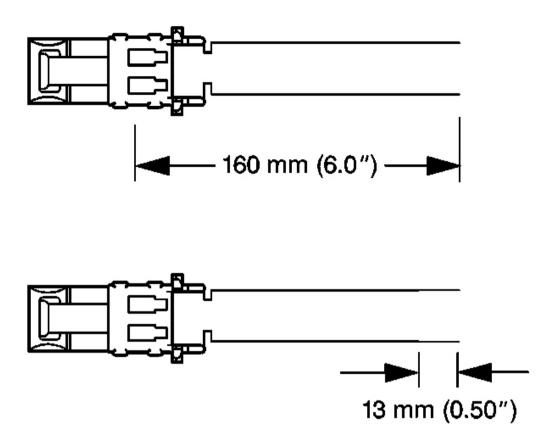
Stripping Connector Wire Lead Courtesy of GENERAL MOTORS CORP.
